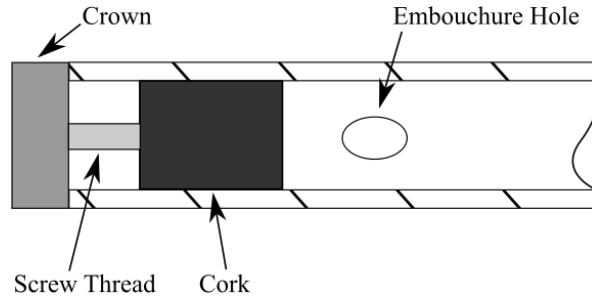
Cutaway view of flute headjoint showing position of cork mechanism and embouchure hole.
